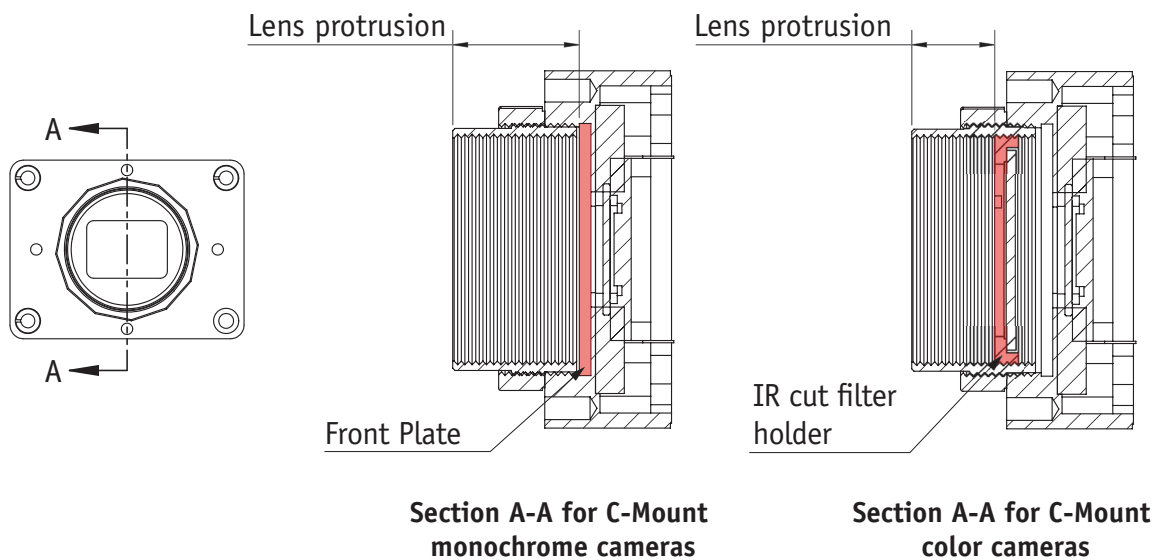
Cross section of typical Prosilica GE front assembly with C-Mount
